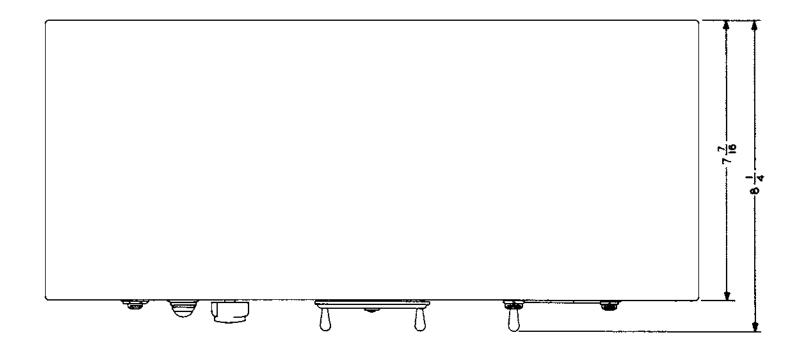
Type 30K-2 Transmitter Outline and Mounting Dimensions
